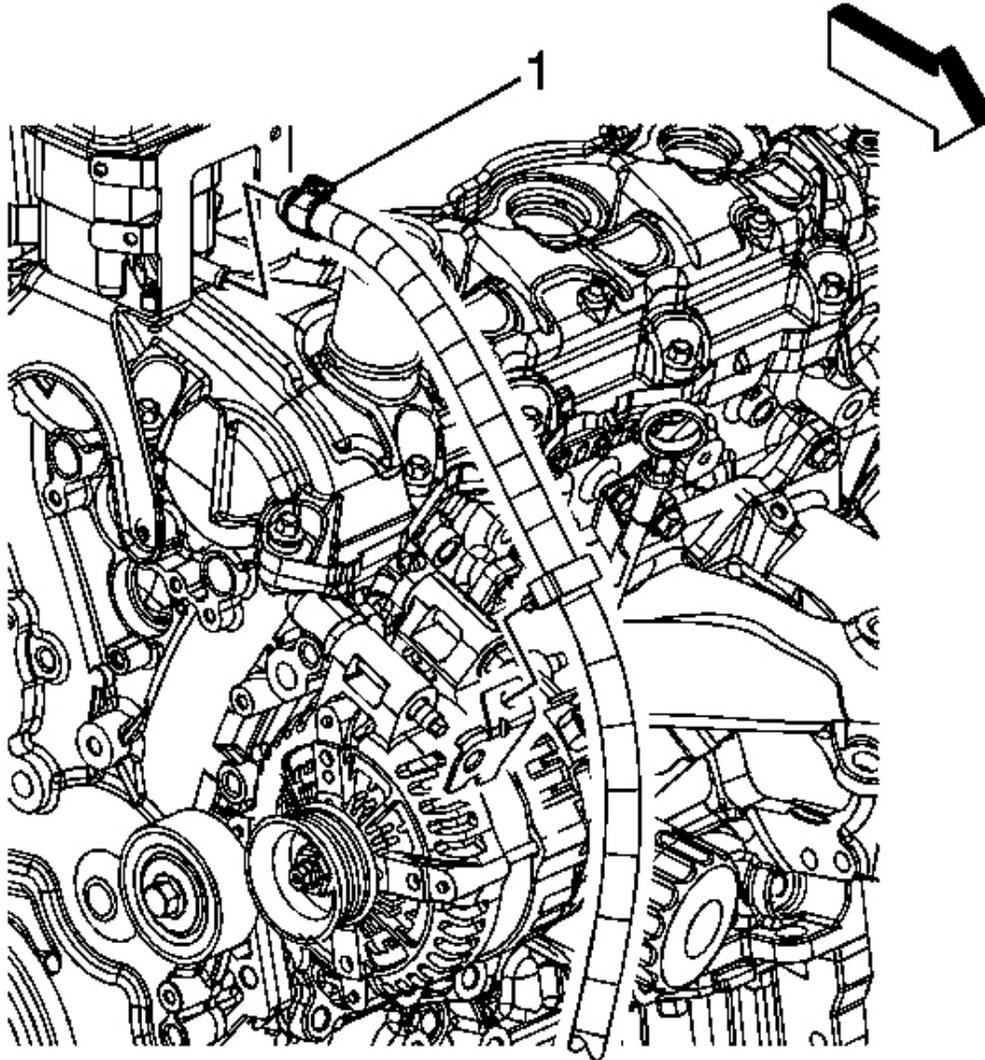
Identifying Power Steering Reservoir Inlet Hose & Clamp
